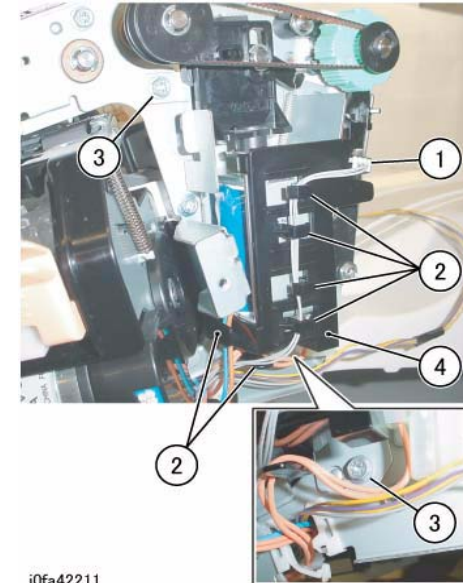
Removing the Sub Paddle Solenoid Assembly (j0fa42211)
